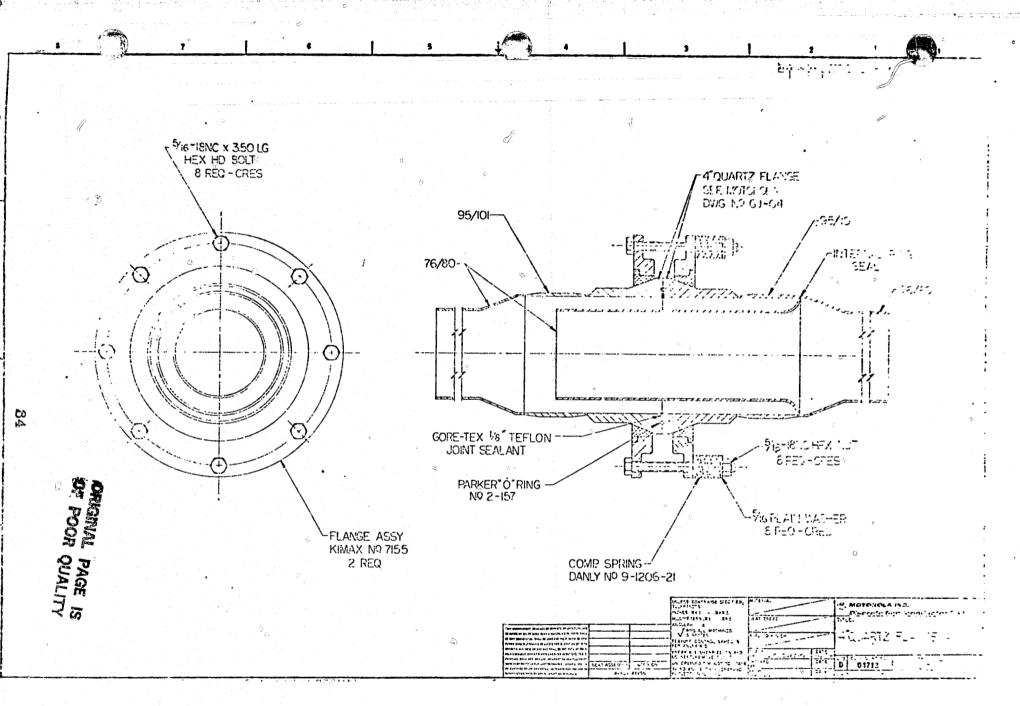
In the figure above is sketched the entire quartz flange assembly. The assembly is composed of 4" quartz flanges (see Fig.2.3.8), connecting quartz tubing (sizes 95/100 mm and 76/80 mm), and Kimax metal flanges with appropriate bolts, nuts, springs and washers. The flanges are sealed via a duplex Gore-Tex Teflon sealant/Viton o-ring method.
